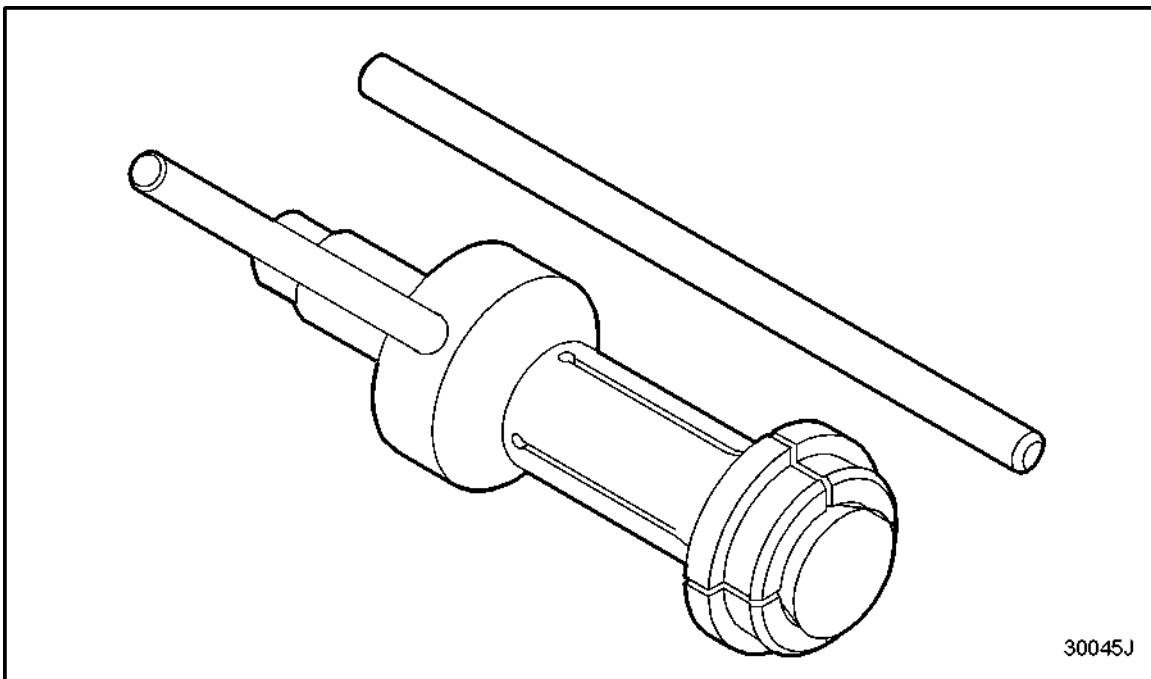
Valve Seat Insert Remove-Ceramic HD, J 22512-A
